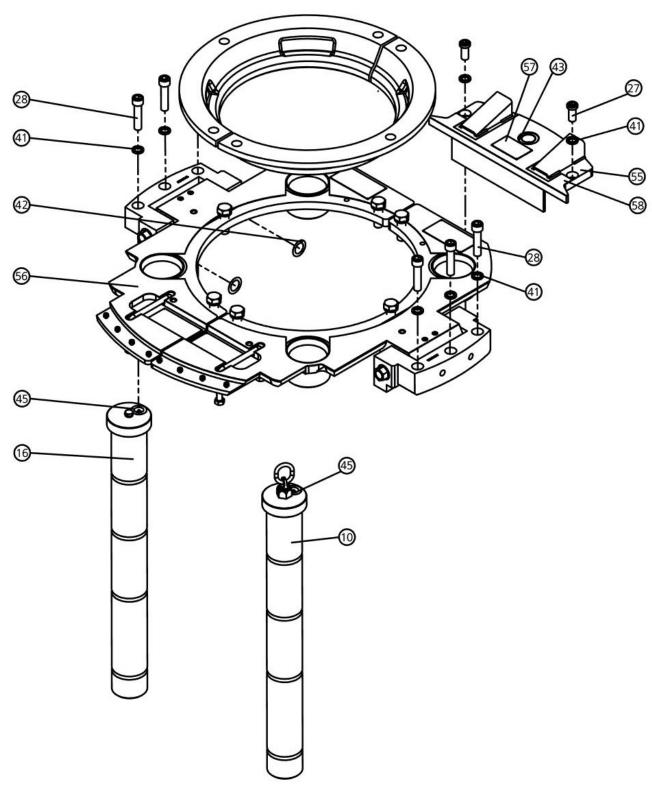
Principle drawing of a FMS-500-AIR part 3
